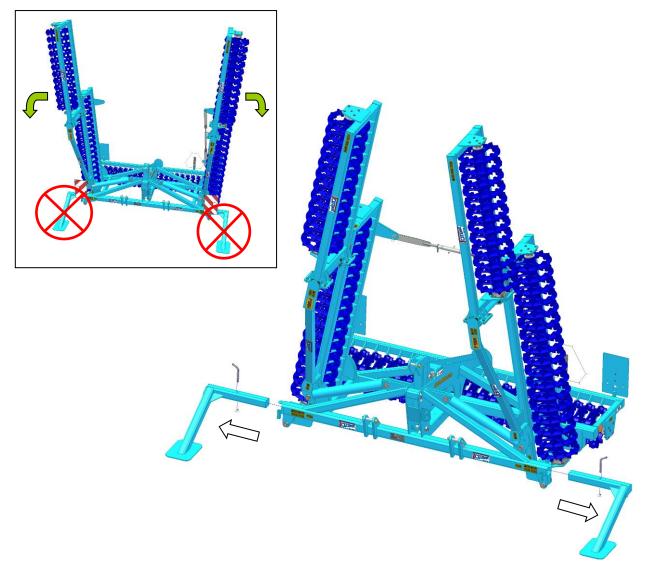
support legs of the machine - removal (necessary prior to unfolding the machine)
